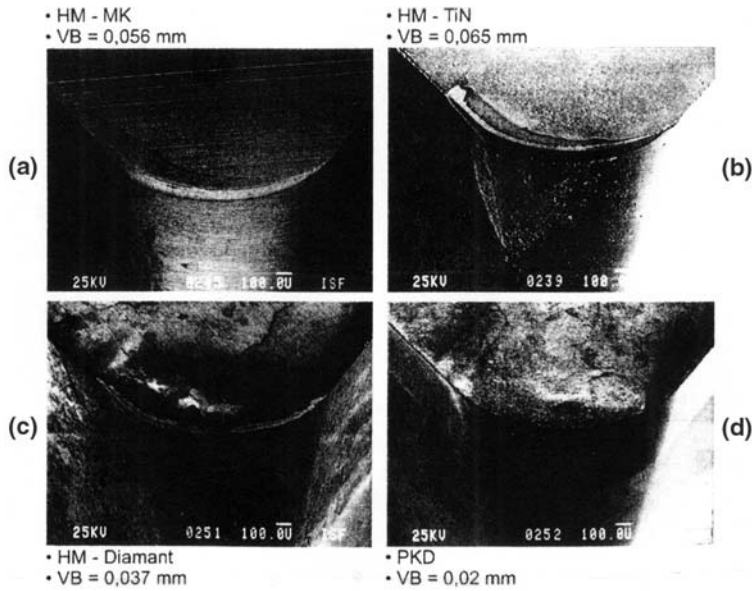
SEM photographs of four cutting tools after 750 sec of cutting of hypereutectic Al-Si alloys: (a) uncoated carbide (VB=0.056 mm); (b) titanium nitride coated carbide (VB=0.065 mm); (c) diamond coated carbide (VB=0.037 mm); and (d) polycrystalline diamond PCD (VB=0.02 mm); (Work material = AlSi25X, cutting speed = 400 m/min., feed = 0.1 mm/rev., depth of cut = 1.0 mm, tool nose radius = 0.8 mm). (From Ref. 16.)
